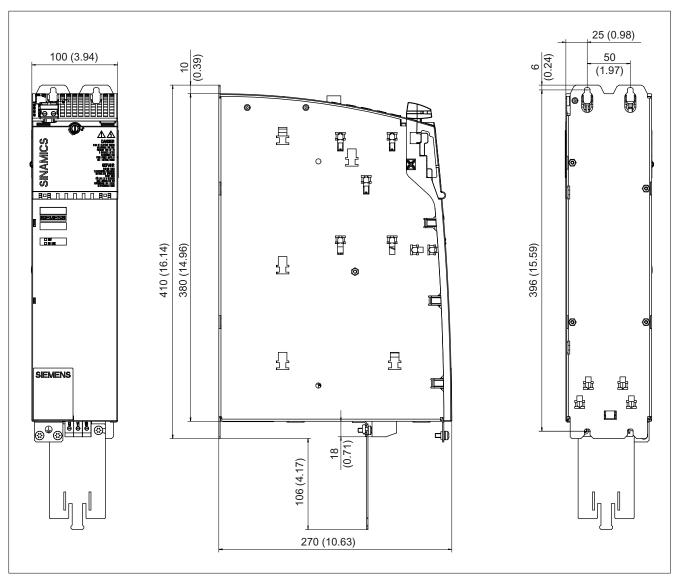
Dimension drawing of 16 kW Smart Line Module with internal air cooling, all dimensions in mm and (inches)
